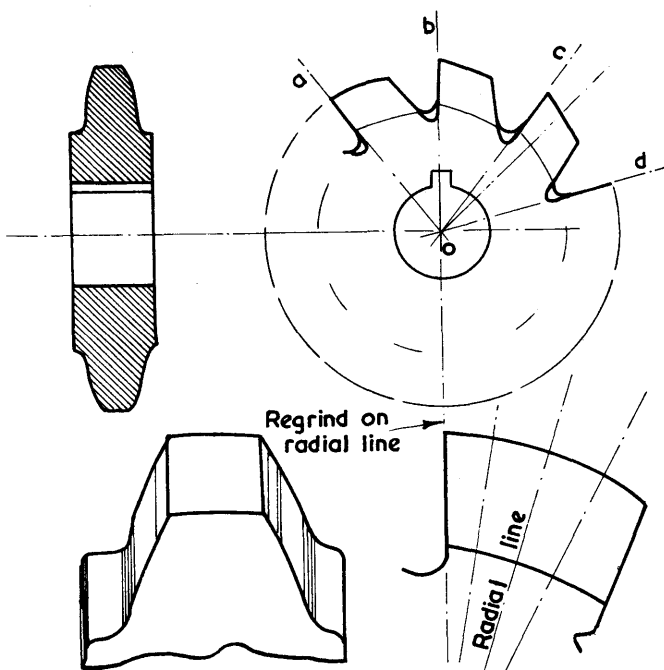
Principle of the Form-relieved Milling Cutter.
